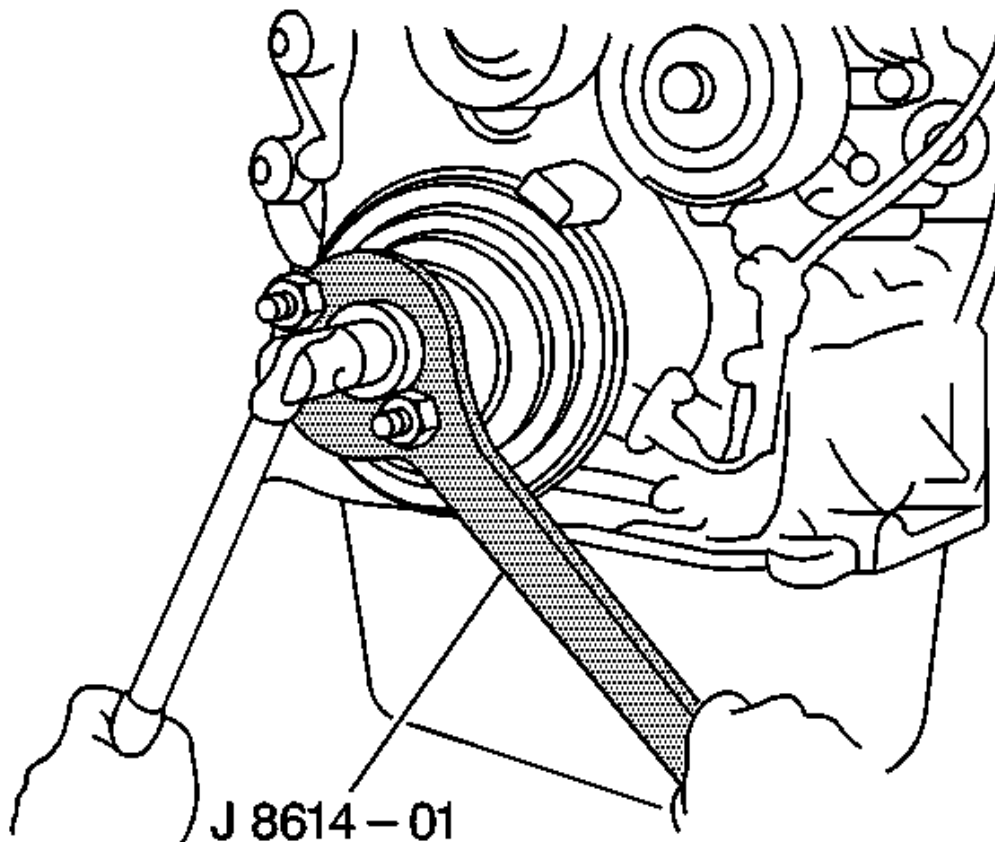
Removing/ Installing Crankshaft Pulley Retaining Bolt
